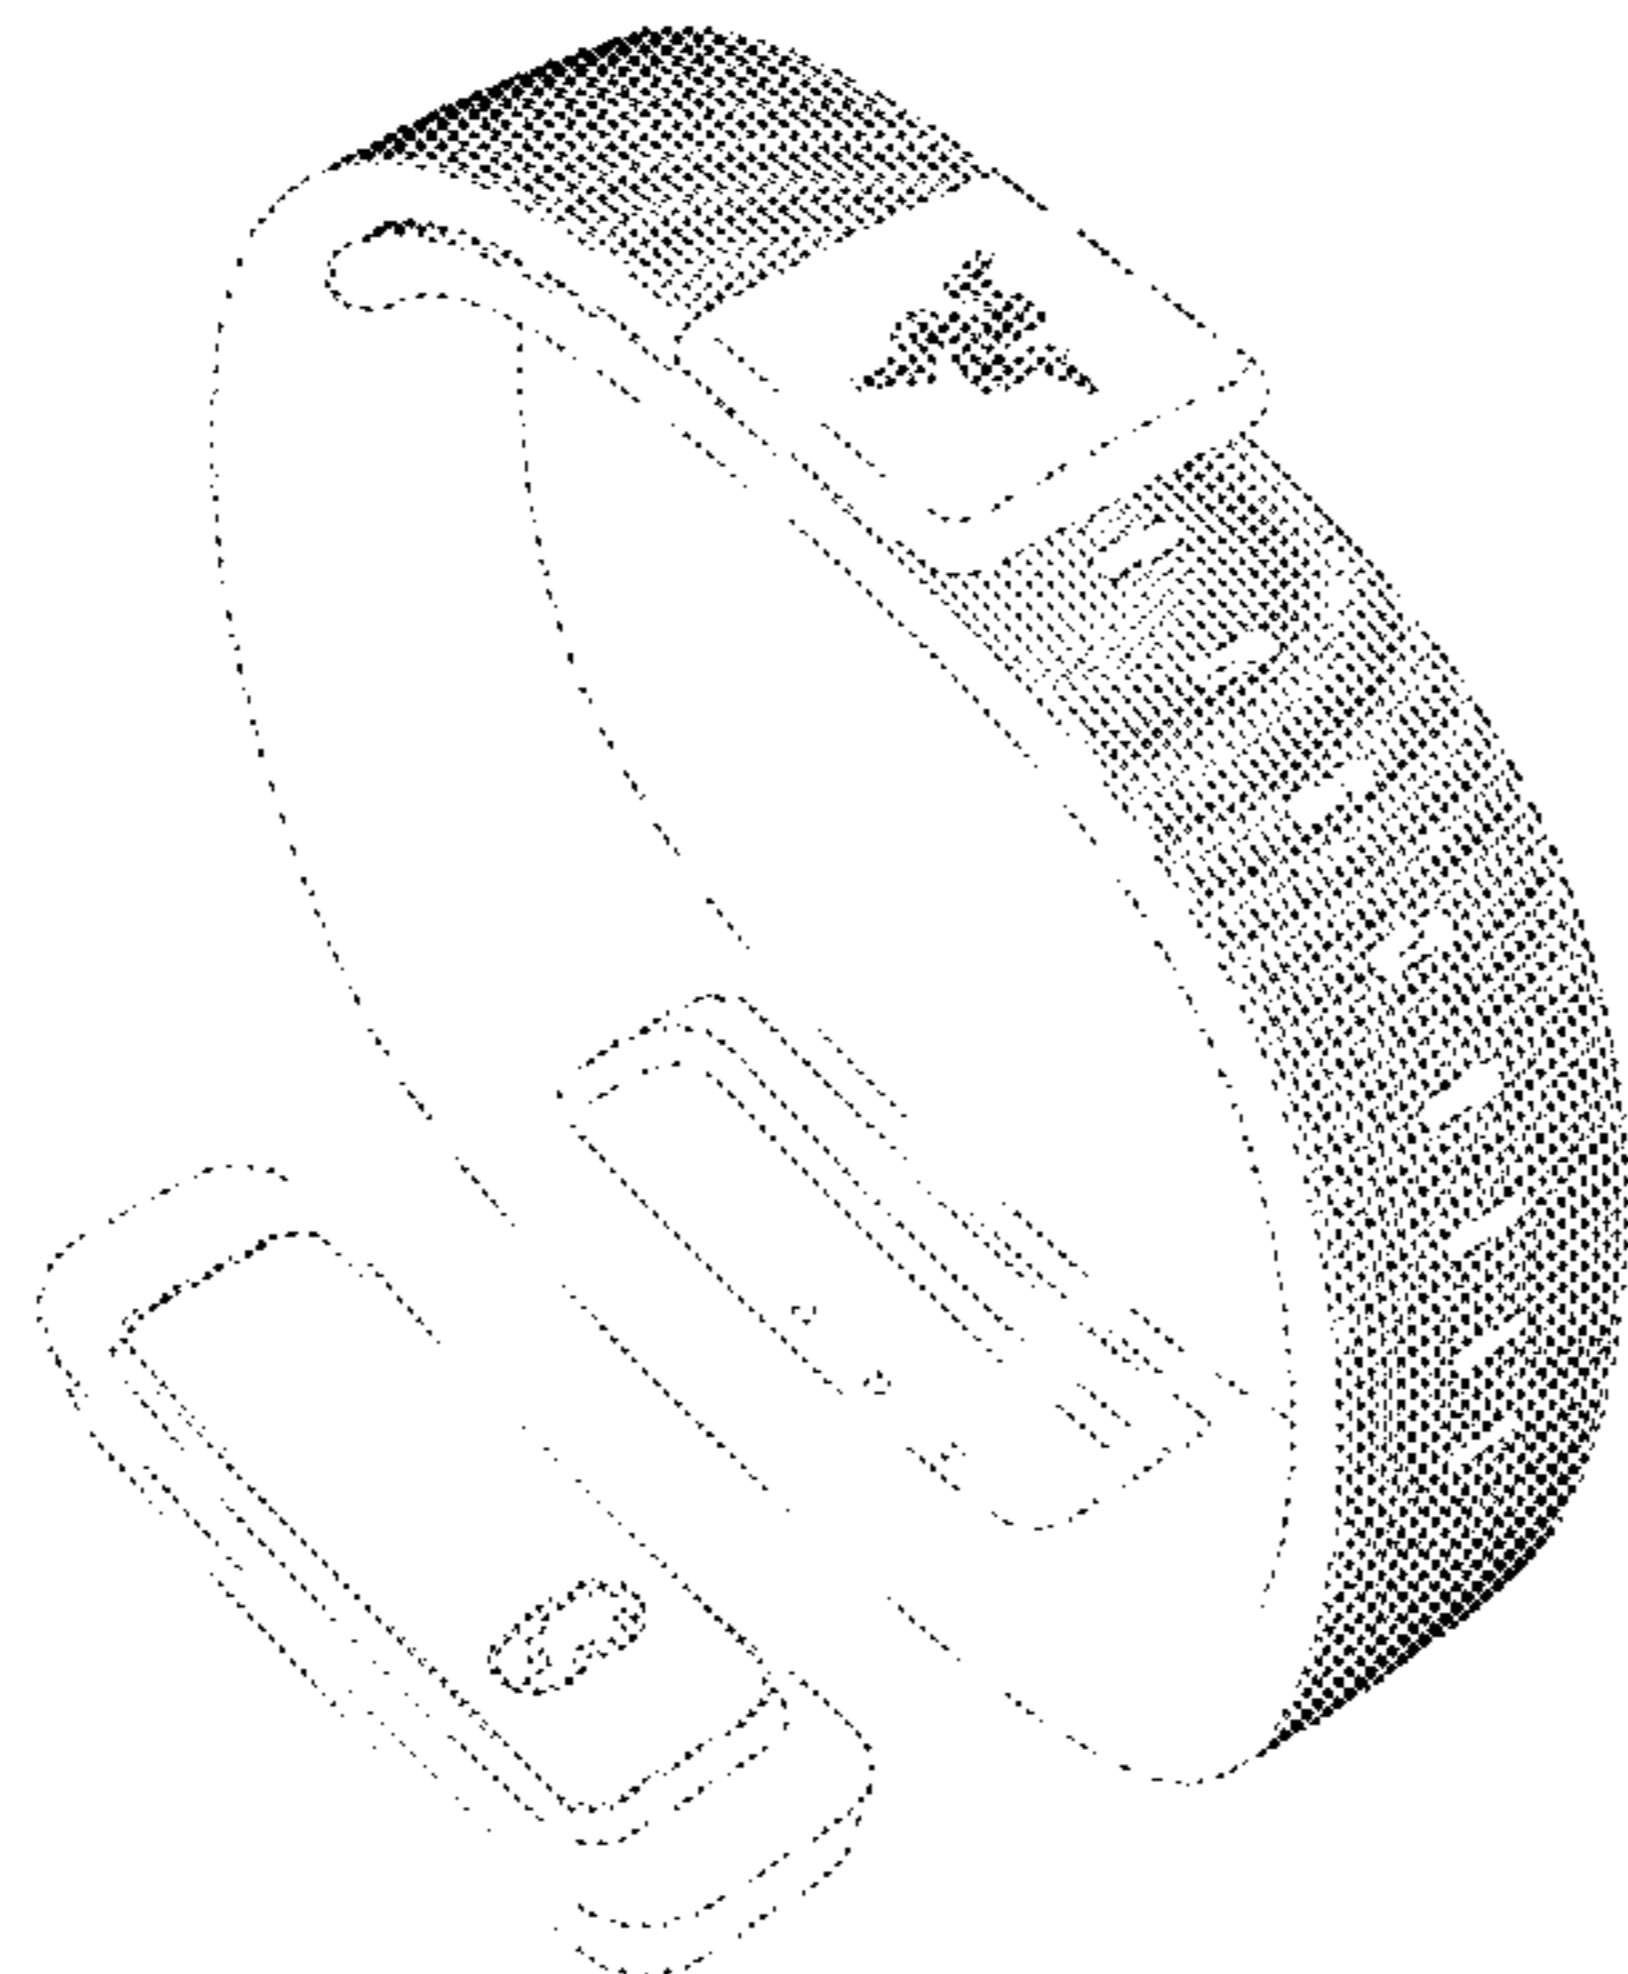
is a bottom perspective view of the wristband, shown in a closed position with module removed.
